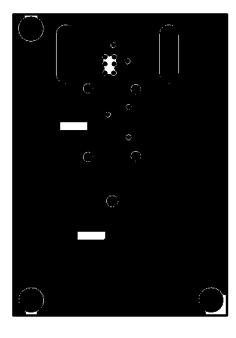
MAX3724/MAX3725 EV Kit PC Board Layout—Ground Plane
